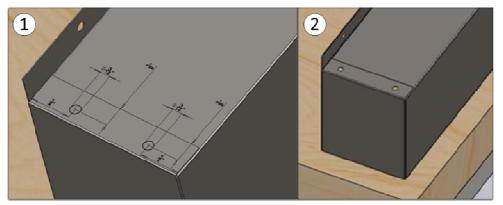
Drilling Holes for Rivets- (1) Mark centers for holes. (2) Drill holes through both pieces of the work piece.
